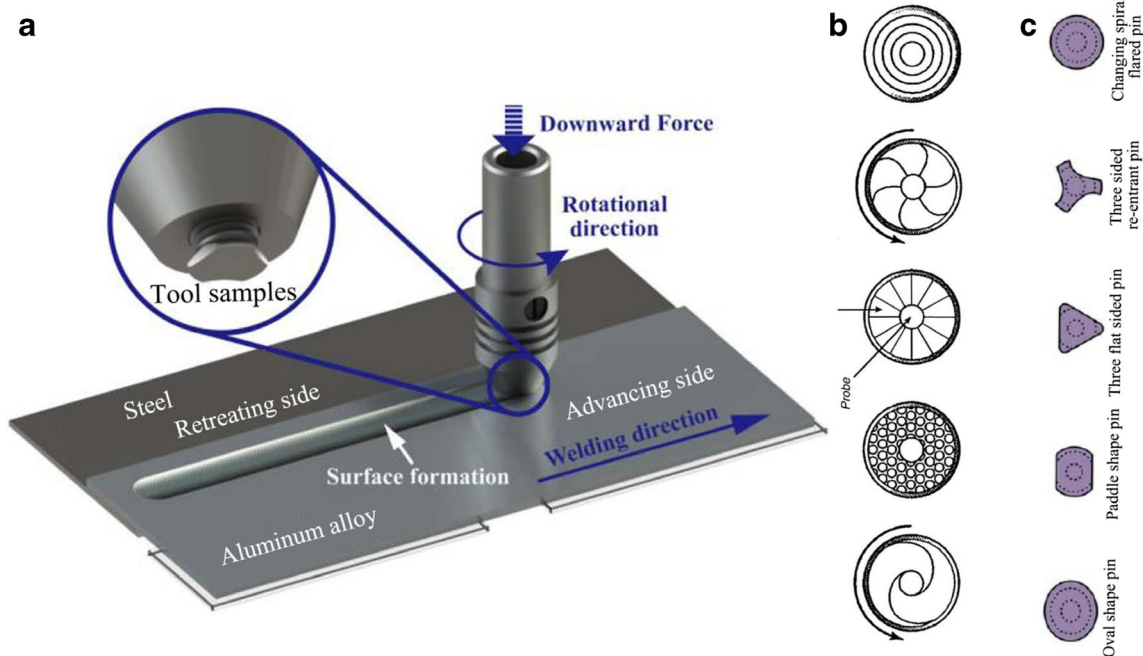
Schematic diagram of FSW process. a Basic FSW process, b different tool shoulders, and c different pin shapes
